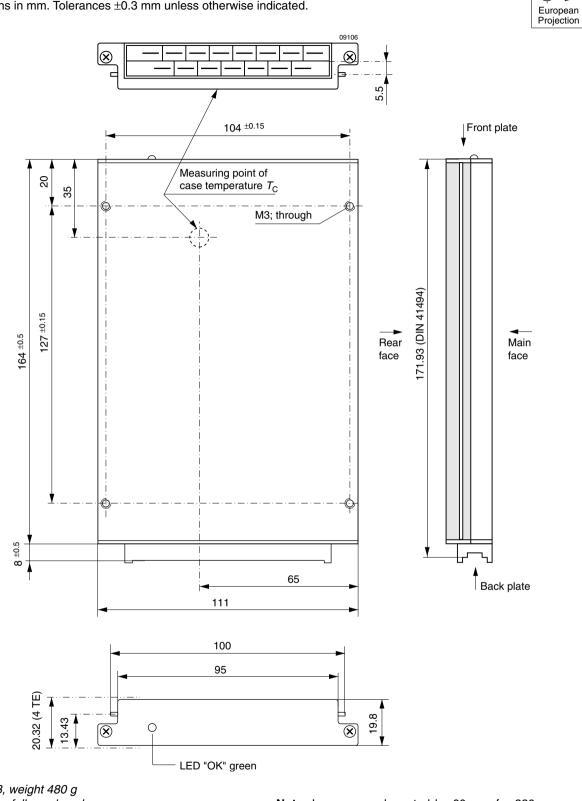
Case Q03, weight 480 g Aluminium, fully enclosed, black finish and self cooling
